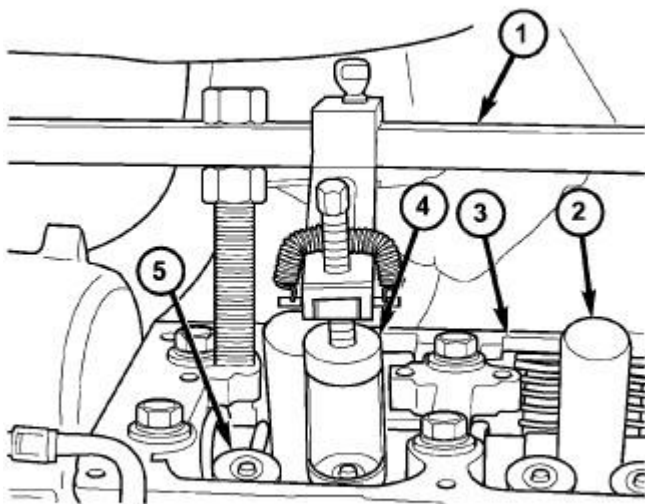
Checking Valve Tip Height and Valve Spring Installed Height
